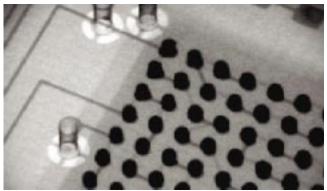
X-Ray Image at 45° Showing Insufficient Heating in One Corner of the BGA
